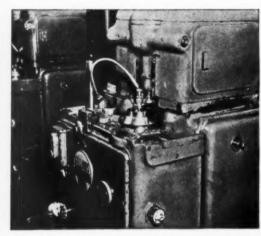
Shaping anti-aircraft gun director gear on a Fellows Gear Shaper prior to finish shaving. Six seconds is required to shape one tooth.
